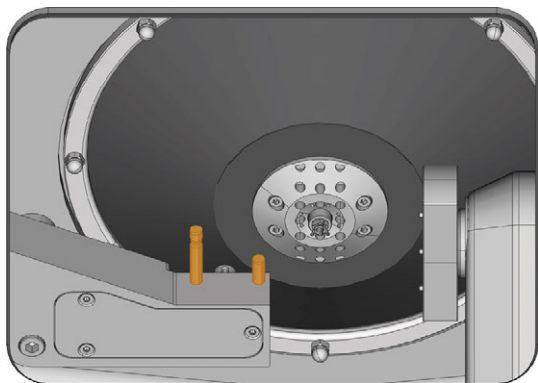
THE BOLTS OF THE TOOL MAGAZINE HOLDER (MARKED ORANGE)
